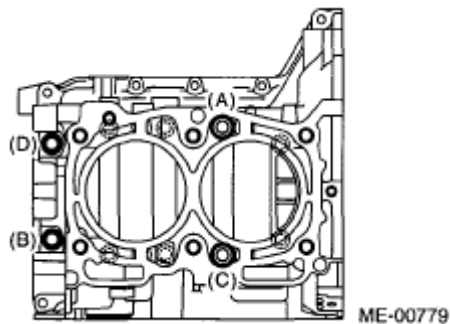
Identifying Cylinder Block Bolts Tightening Sequence (LH Side)
